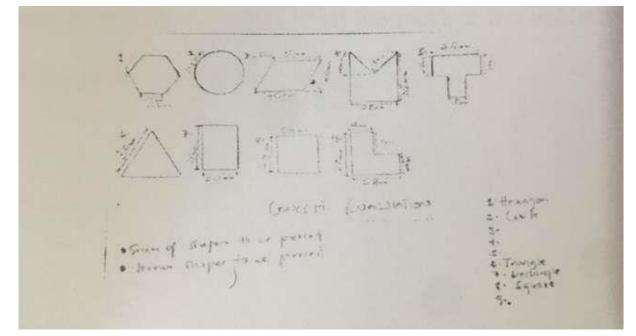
Dimensions of Shapes for Toddlers' Puzzle.
